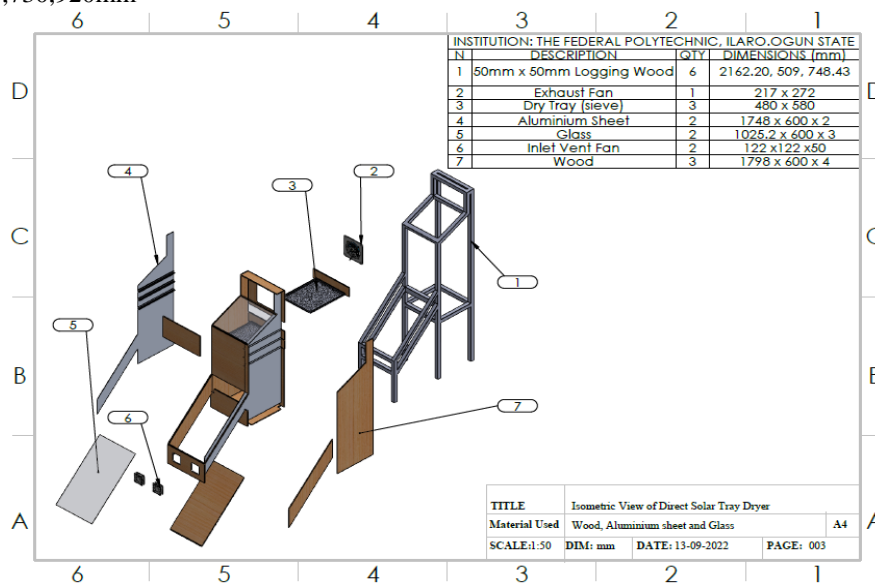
Exploded view of the mixed mode solar dryer design
